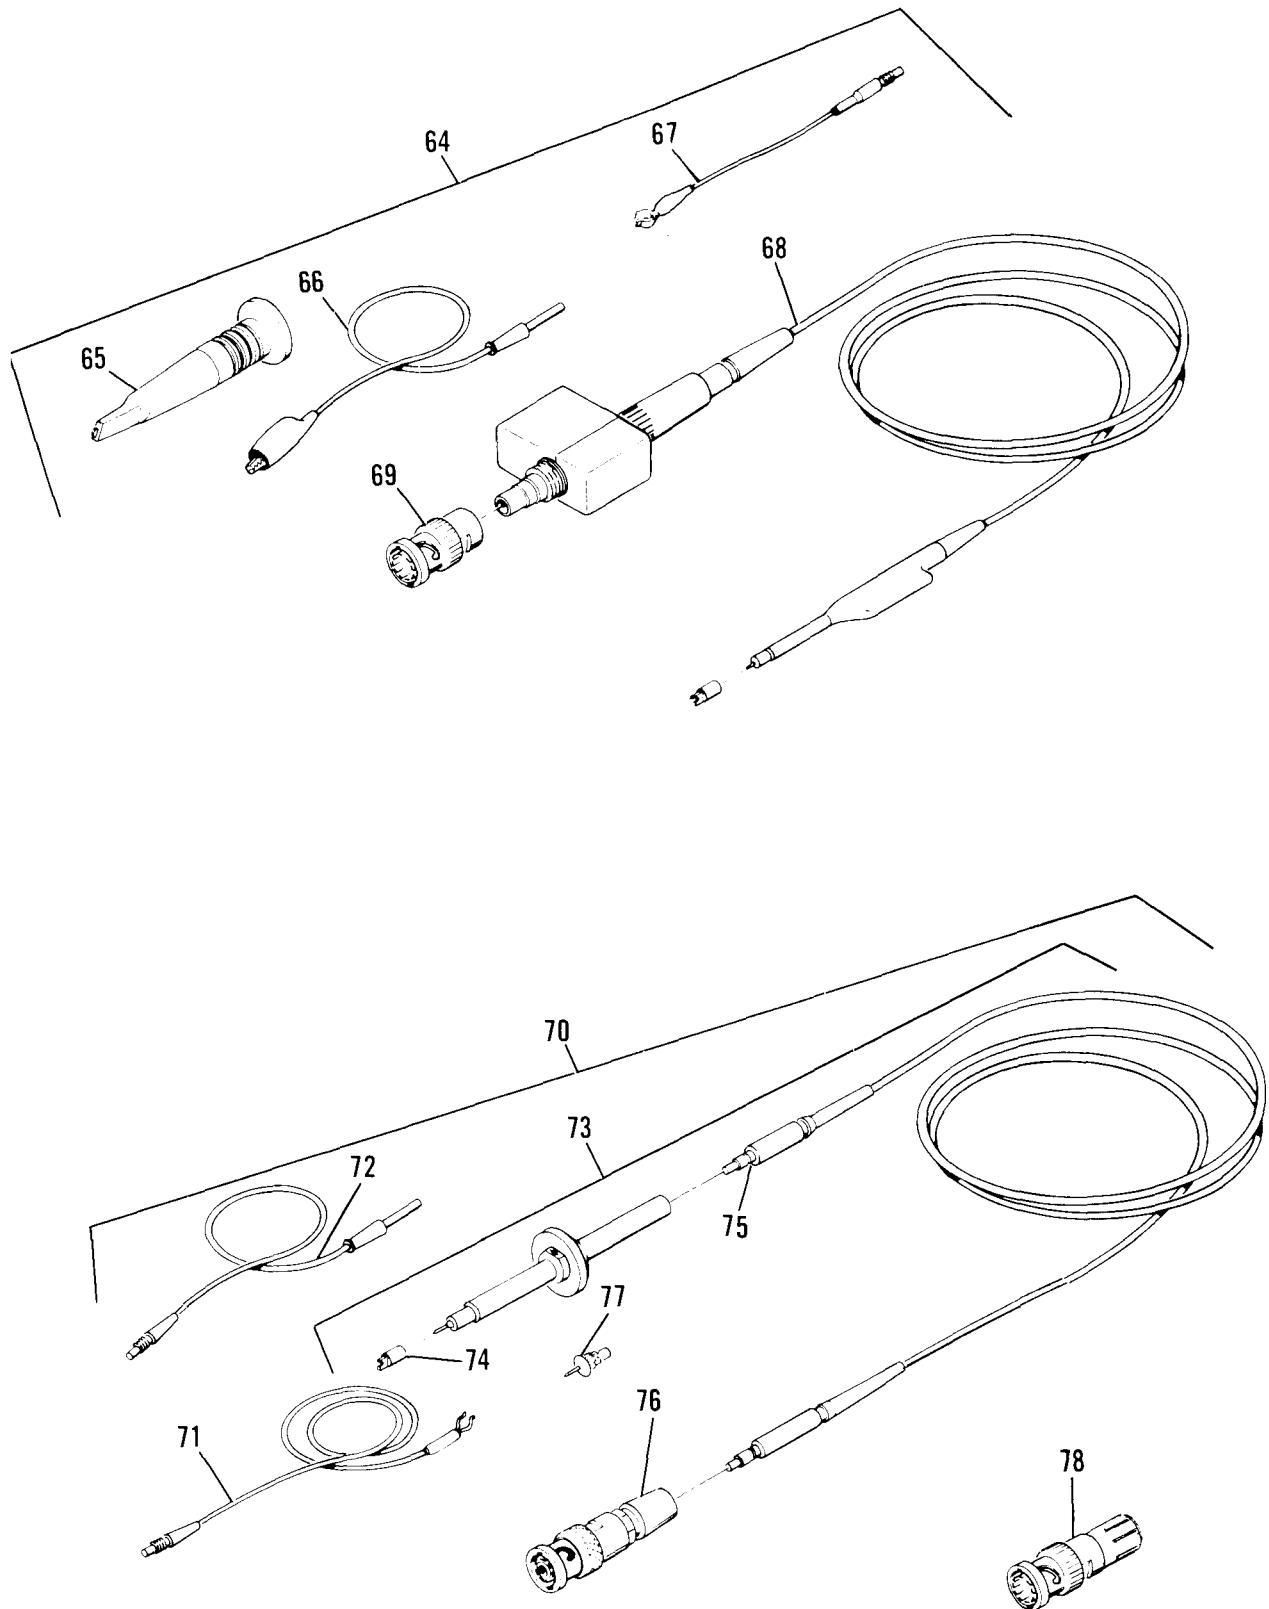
Oscilloscope AN/USM-488 Exploded View (Sheet 4 of 4)
